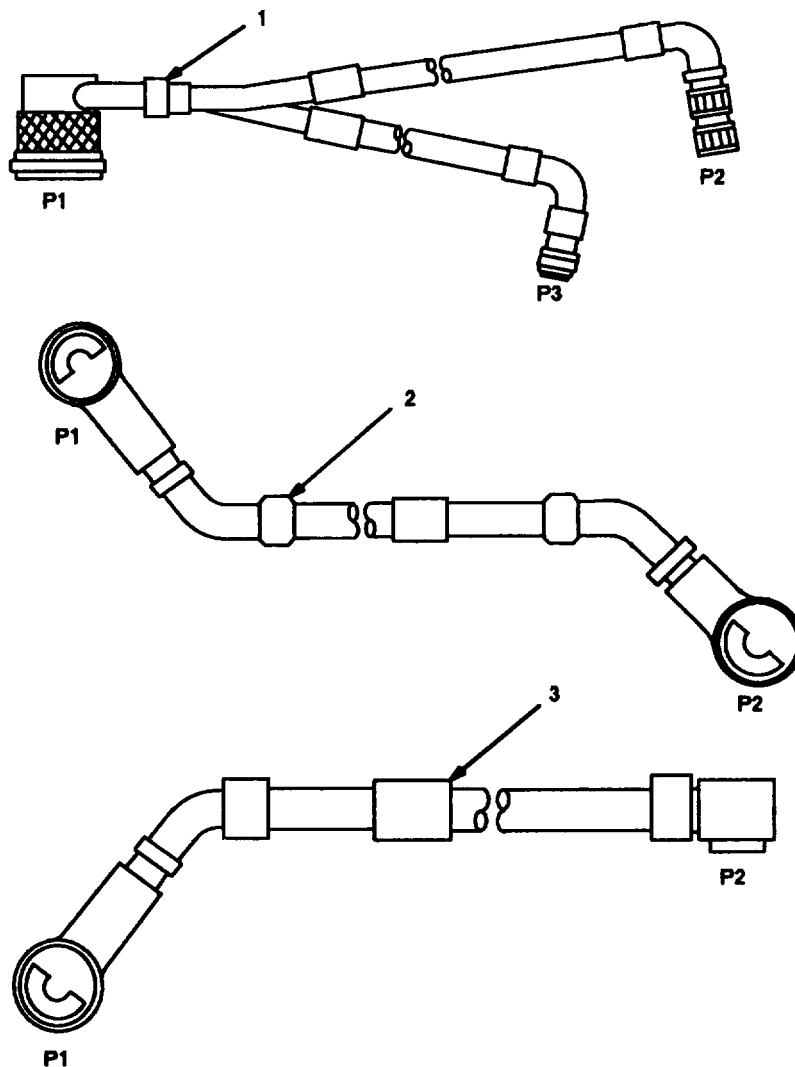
TSEC/KY-57 Illustrated Parts List
